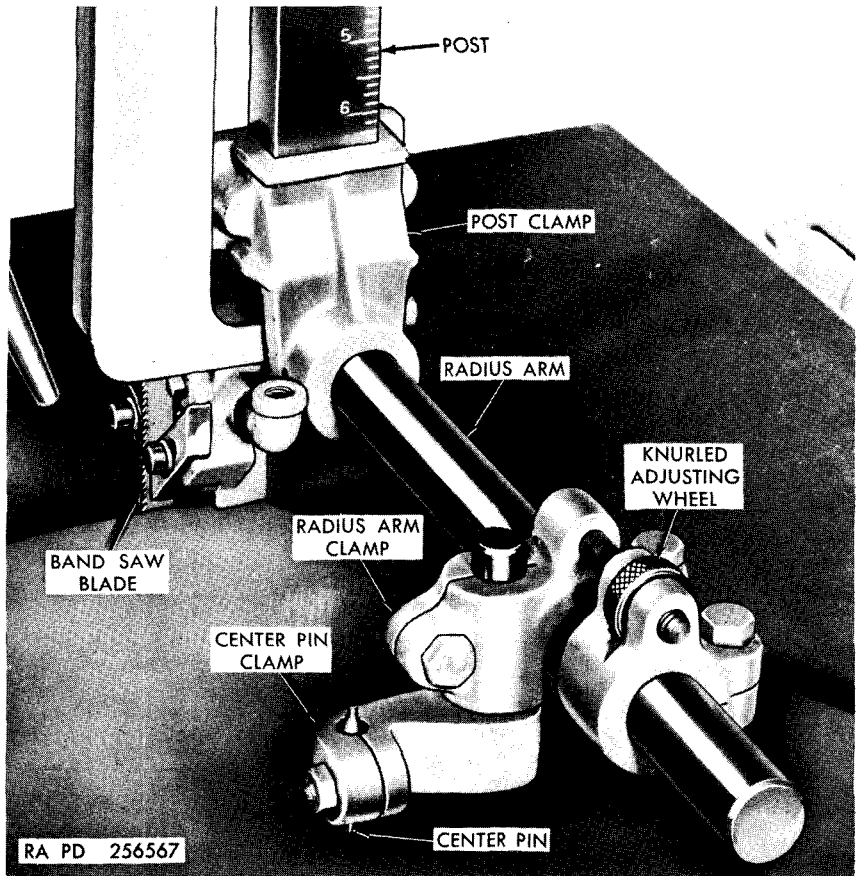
Disk cutting saw attachment installed on band sawing machine.
